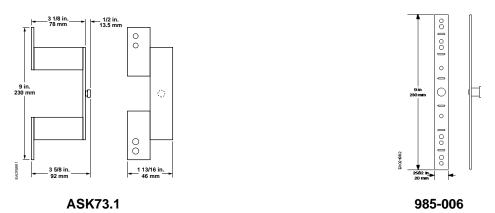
Dimensions of the GBB/GIB Actuator and Mounting Bracket in Inches (mm).
